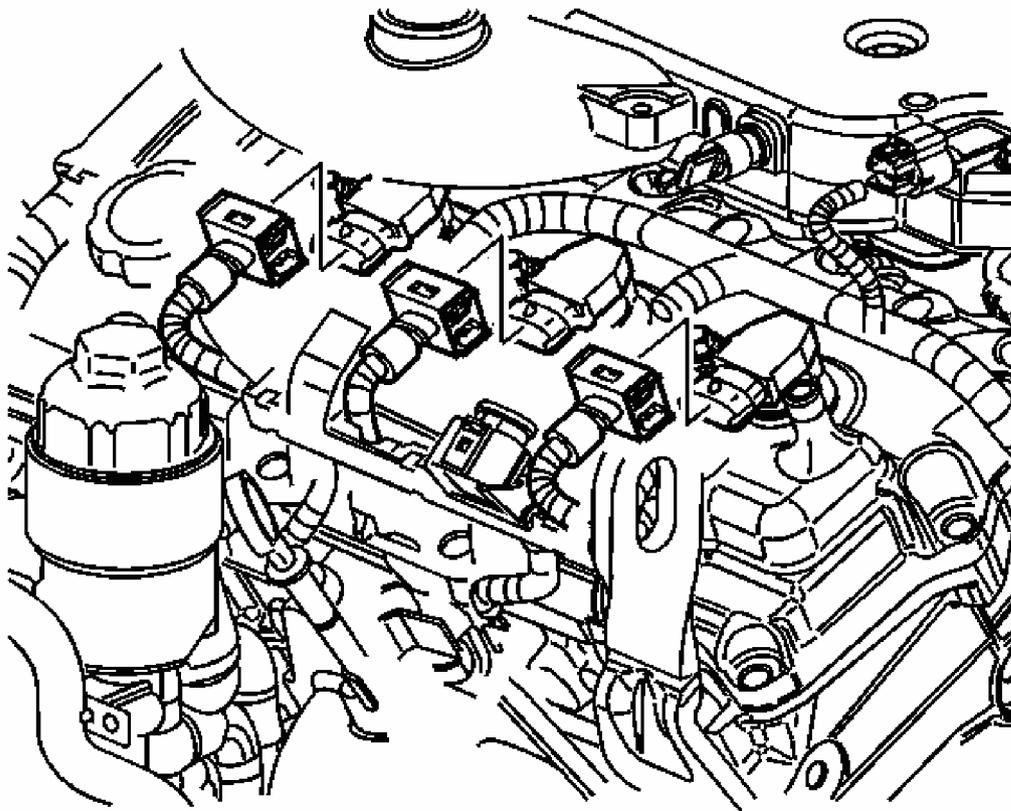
View Of Left Ignition Coils Wiring Harness Connectors
